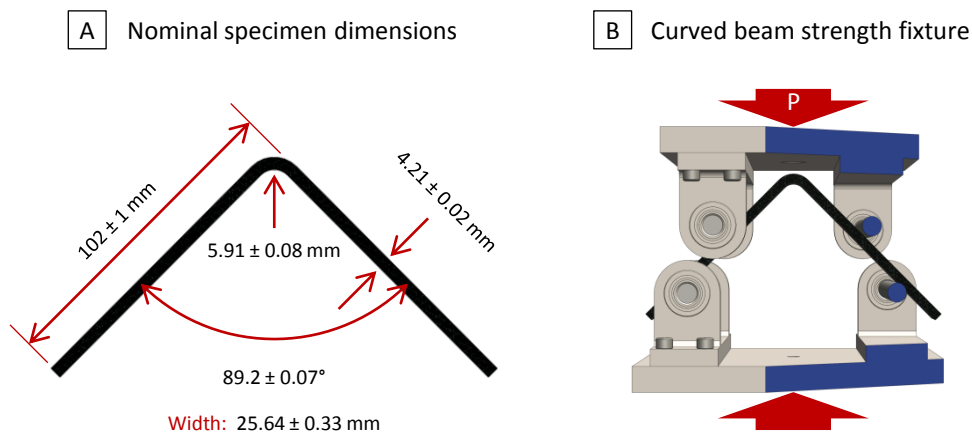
Schematics of the A) nominal corner specimen dimensions and B) the curved beam strength fixture (ASTM D6415) with a loaded specimen (the fixture is partially sectioned-off in blue to more clearly show roller-specimen contact).
